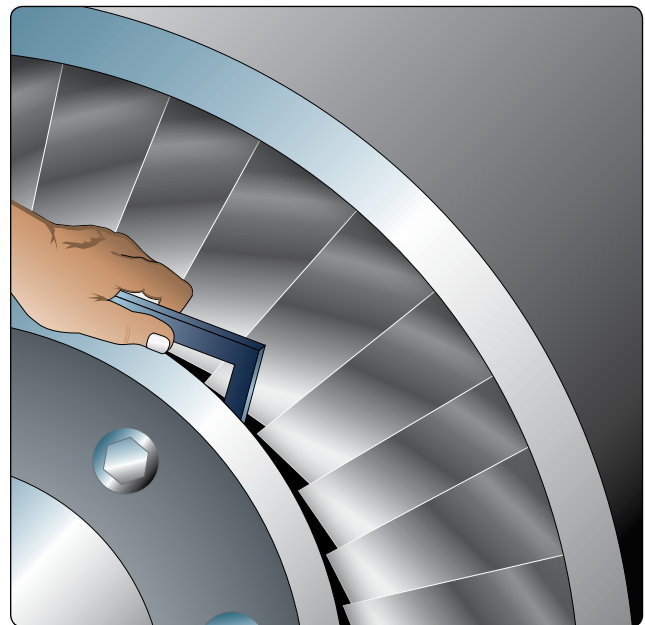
Measuring turbine wheel to exhaust cone clearance.
